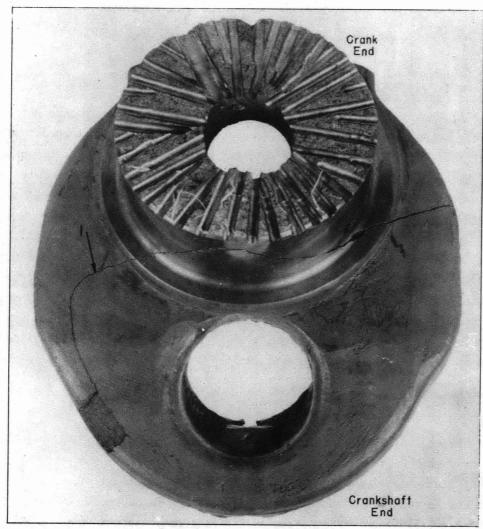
Photograph of Break in Engine End Web of Crank 9 on 2000-HP Diesel Engine Generator Set, Looking Away from Generator
